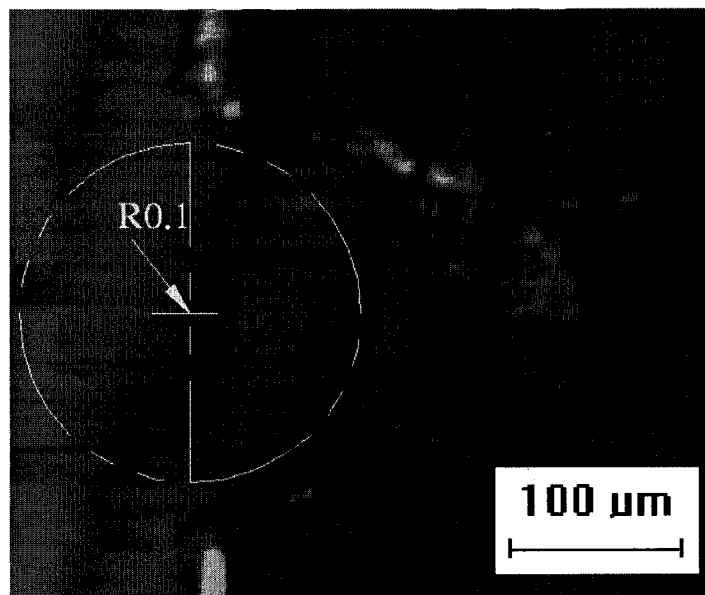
Semi-circular profile micro-groove laser machined using DML40SI machine. Desired radius=0.10mm.
